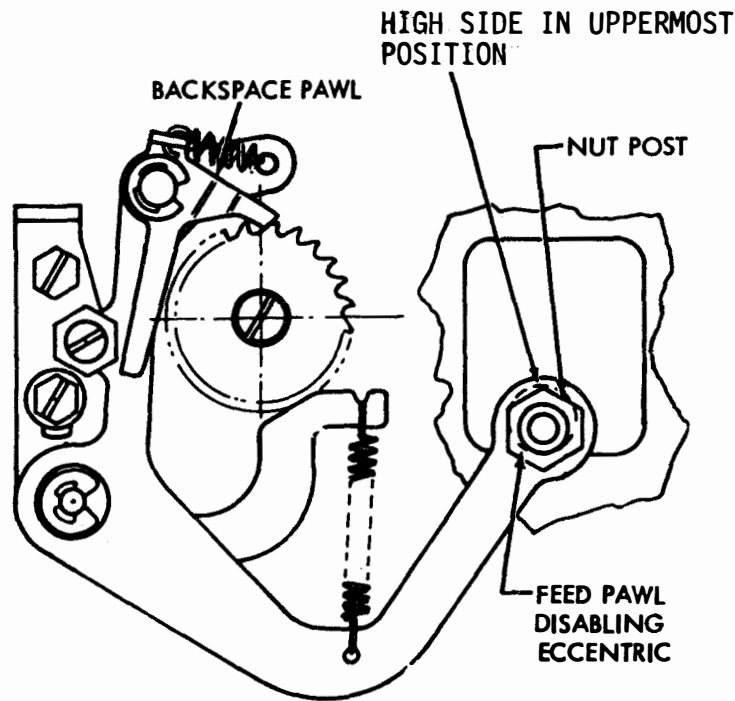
Feed Pawl Disabling (For Fully Perforated Tape), Perforator
